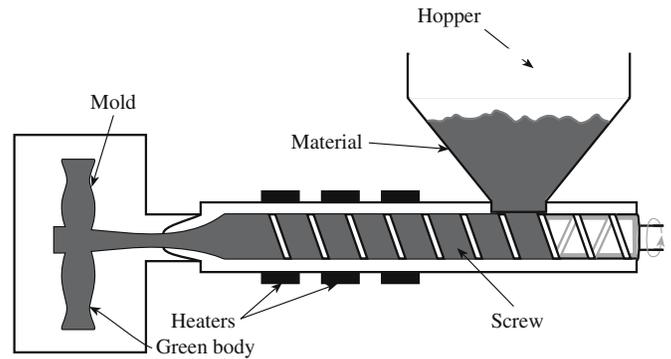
Cross-sectional side view of a screw-type machine.
